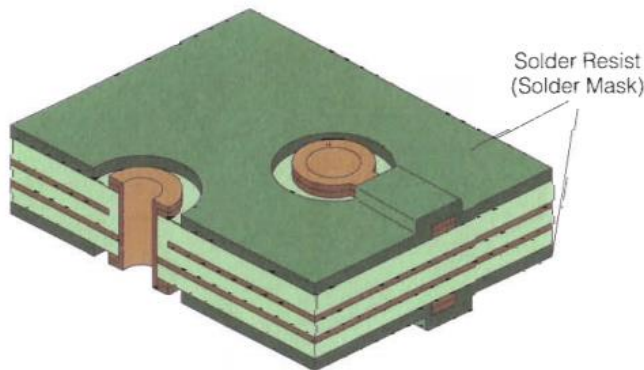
Apply solder resist.* The specified resist (either dry film, liquid photoimageable, or screen printed) is applied to the surfaces of the PCB or panel.
